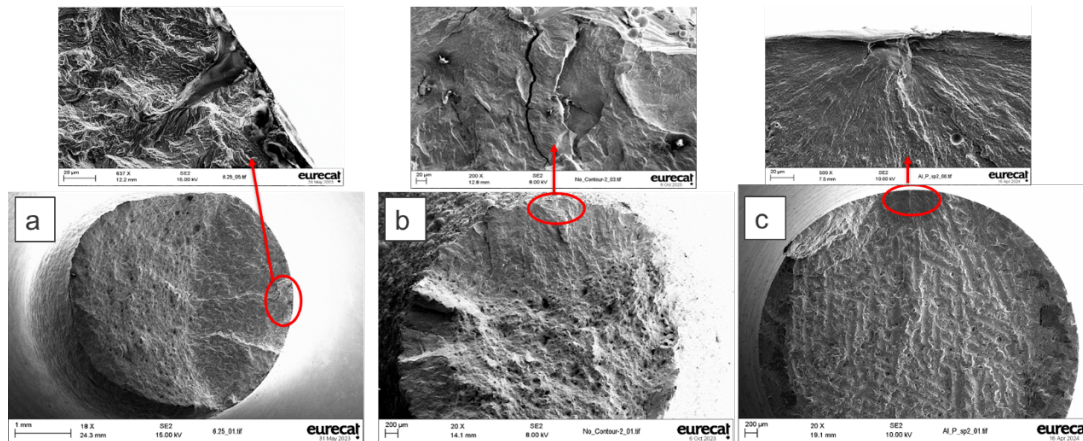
Scanning electron microscopy of the fracture surface of laser powder bed fusion specimens, highlighting the fatigue crack nucleation site from a) Sharp lack of fusion defect, b) surface valley, and c) near-surface spherical gas pores
